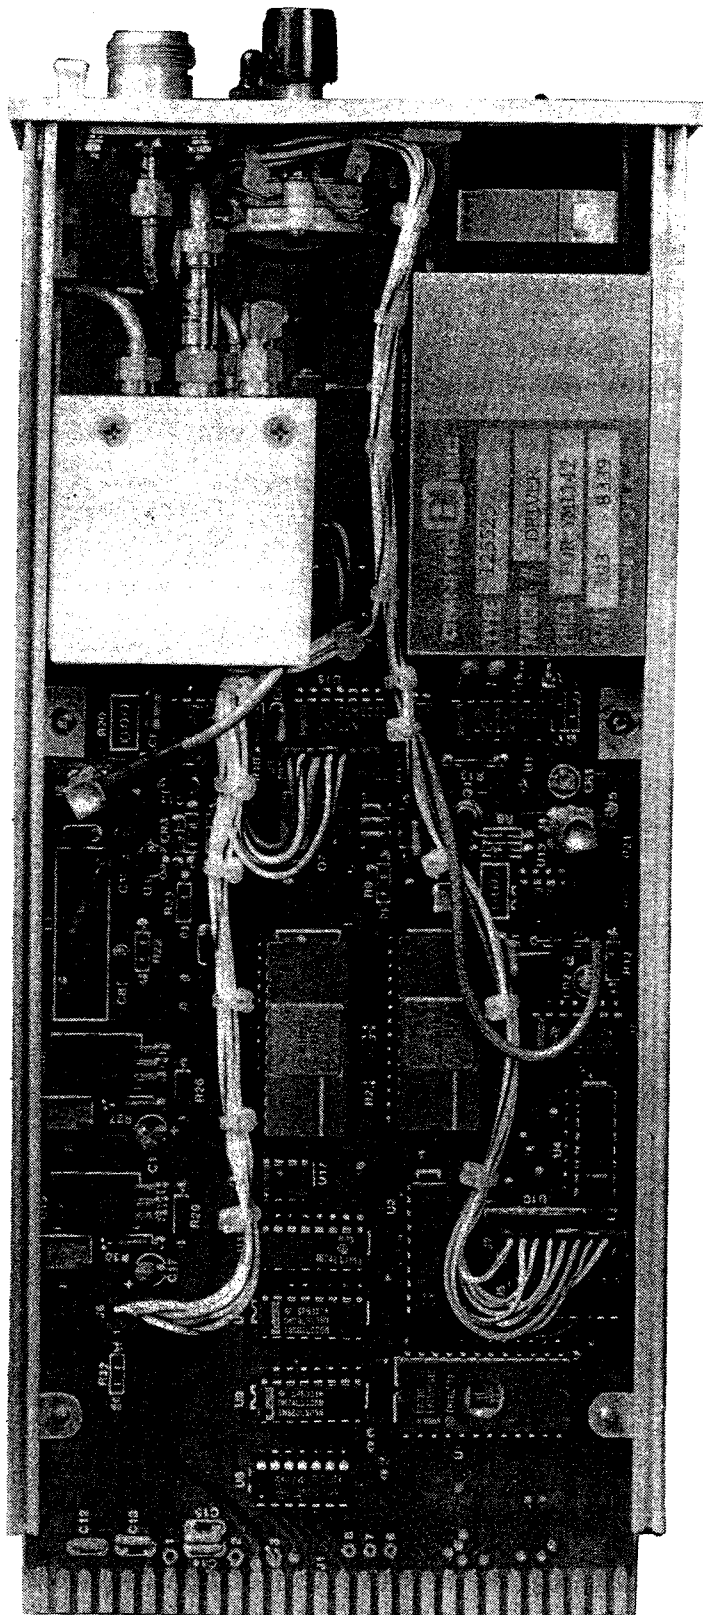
AS210-06 Module Showing Control Circuit and Assembly
